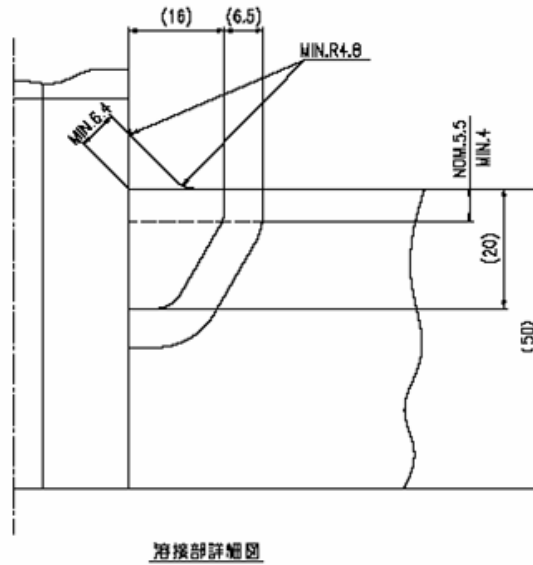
Drawing of Seal Weld Configuration for PINC 5.13 through 5.16 from JNES
